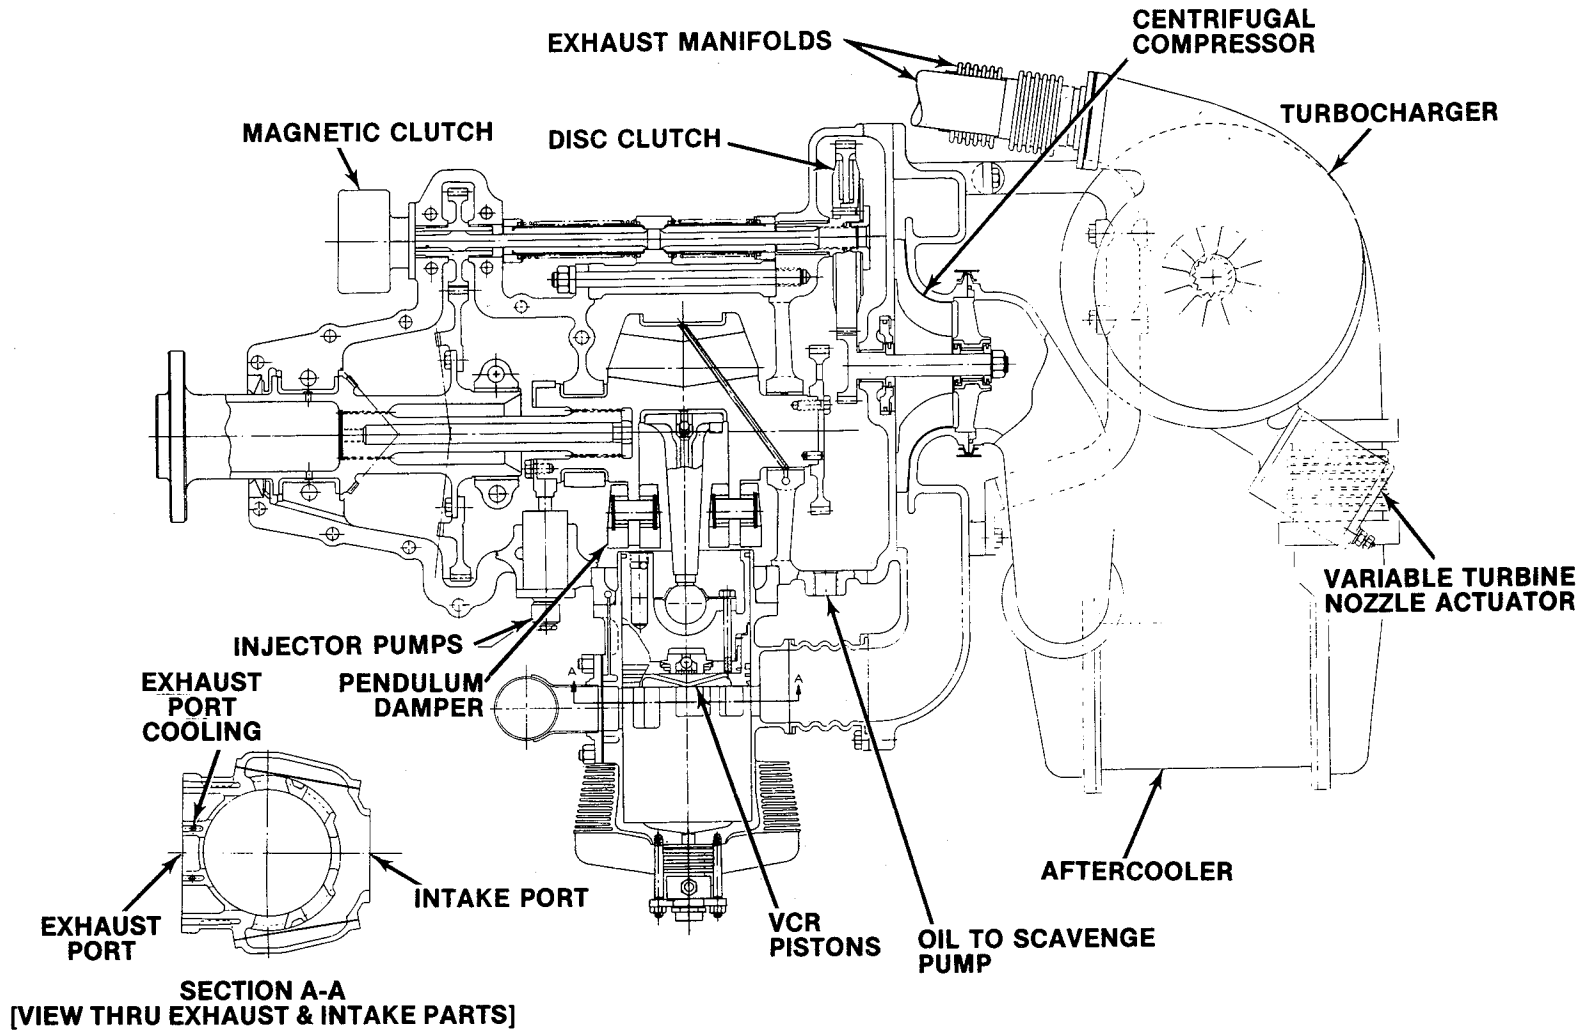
149 kW AIRCRAFT DIESEL—LONGITUDINAL SECTION
